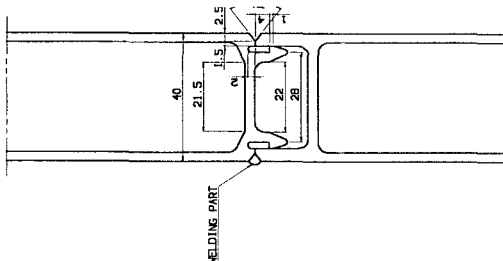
Typical welding joint of aluminum extrusion profile
